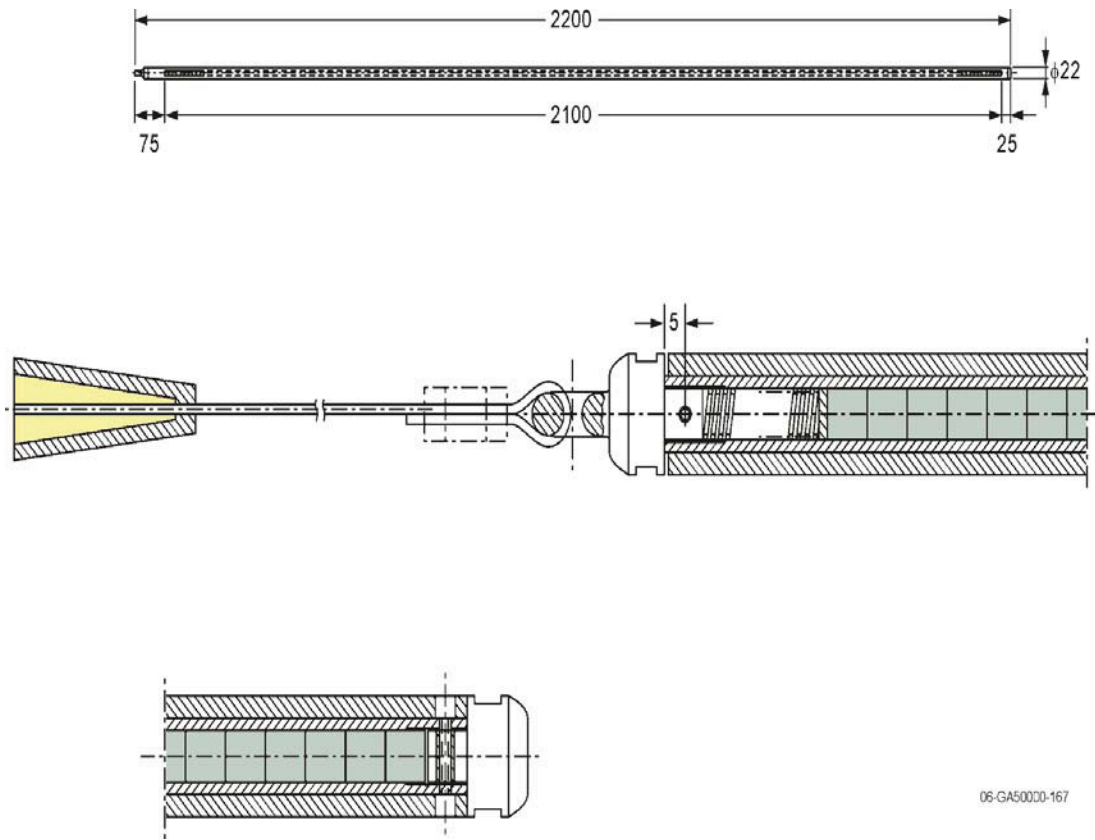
Details of the withdrawable stainless steel control rods (Ref. 2). Units are in millimeters.
